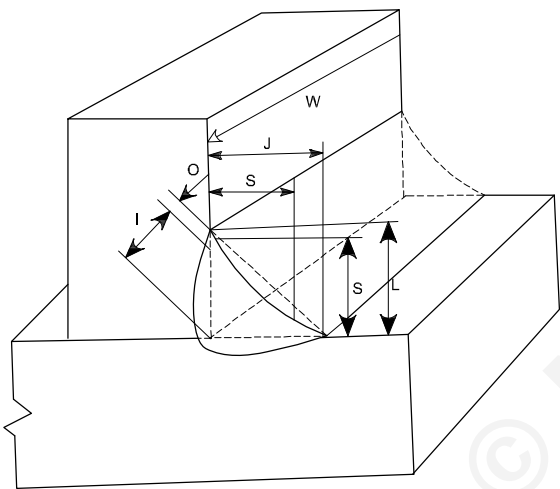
Fillet weld measurements: L: Leg length, S: Fillet weld Size, T: Theoretical throat, V: Convexity, C: Concavity, W: Effective weld length.
